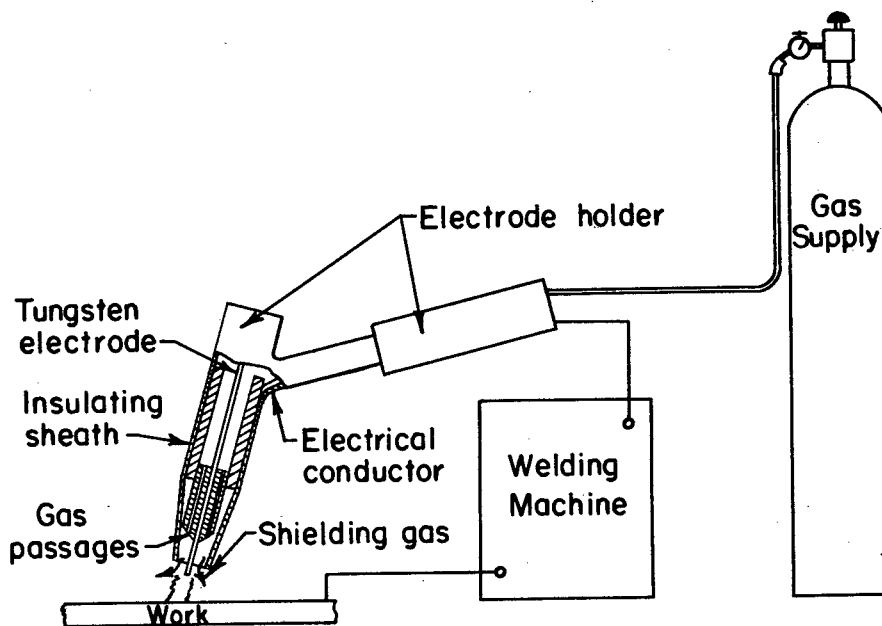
SCHEMATIC DIAGRAM OF THE GAS TUNGSTEN-ARC WELDING PROCESS
